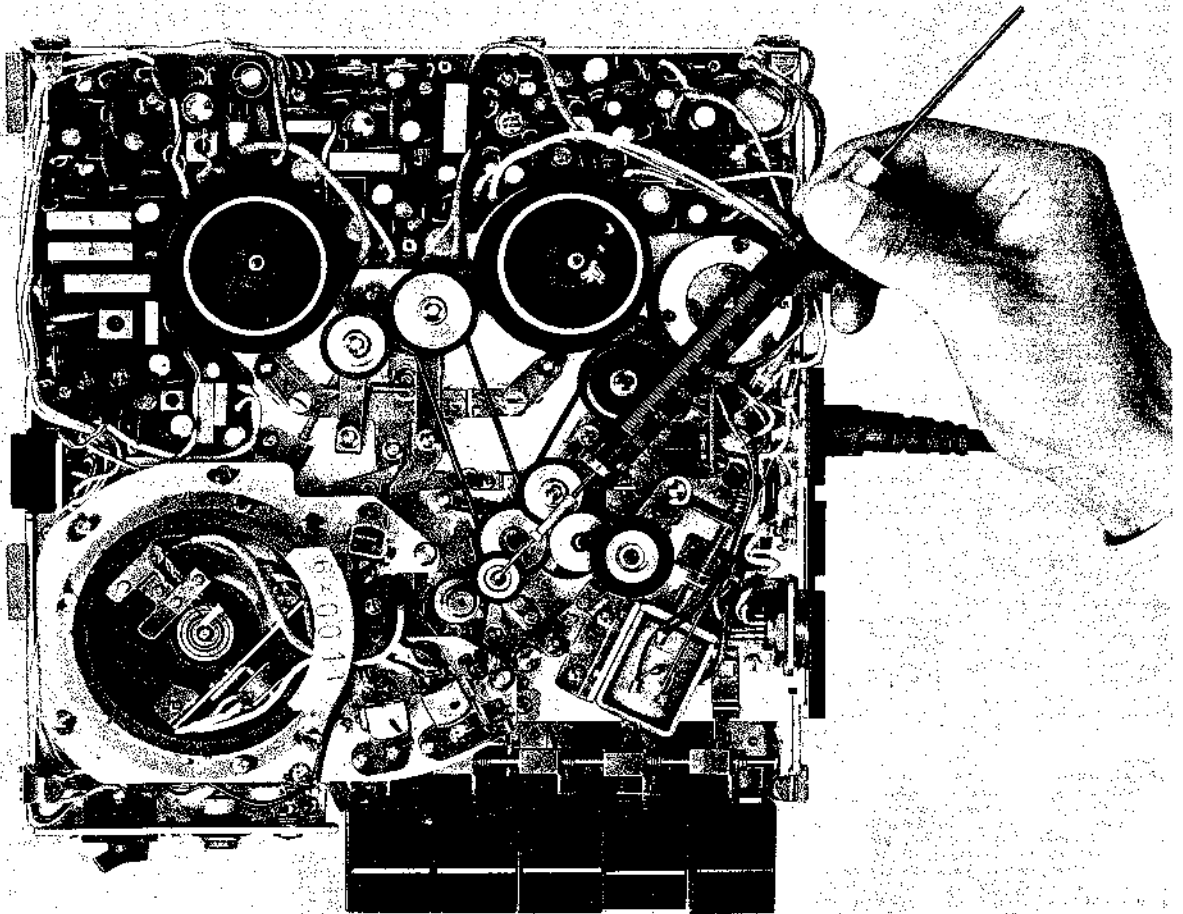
Sub Pinch Roller Pressure Measurement
